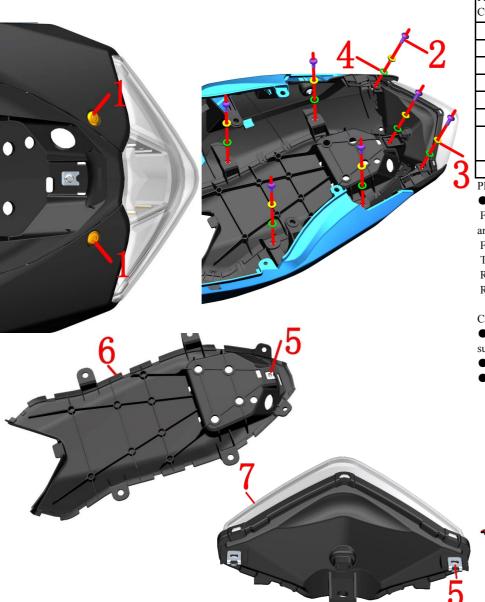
REAR COVER COMPONENT		Rear skirt assembly 2	CHK	(0)
